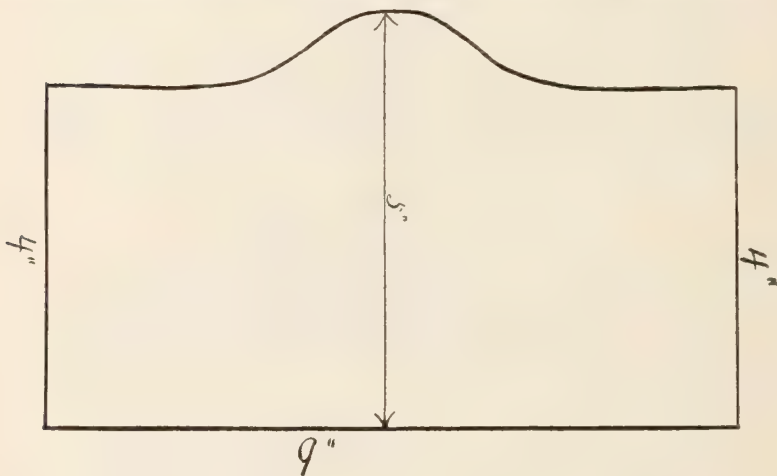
Steel Blank. If the plates are to be used for the Whitman soles, the curved part must be higher and fuller.
